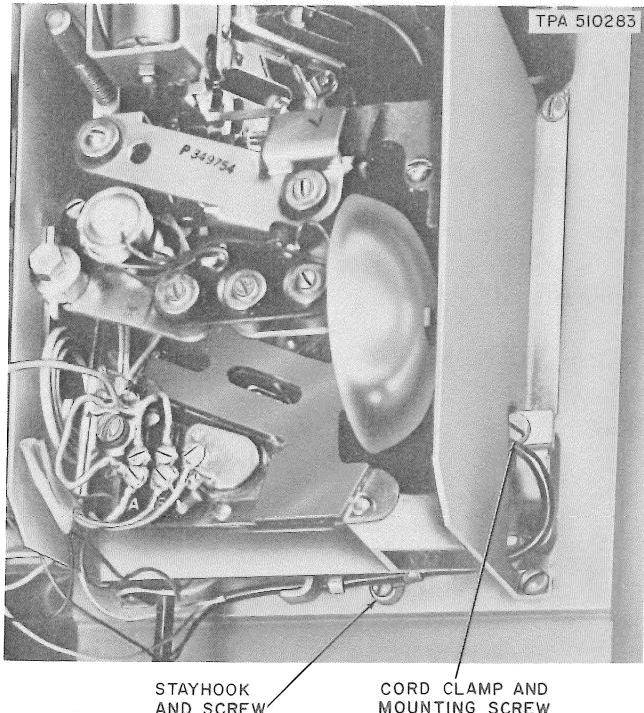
Location of Armored Cord Mounting Hardware in 235- and 1235-Type Coin Collector
